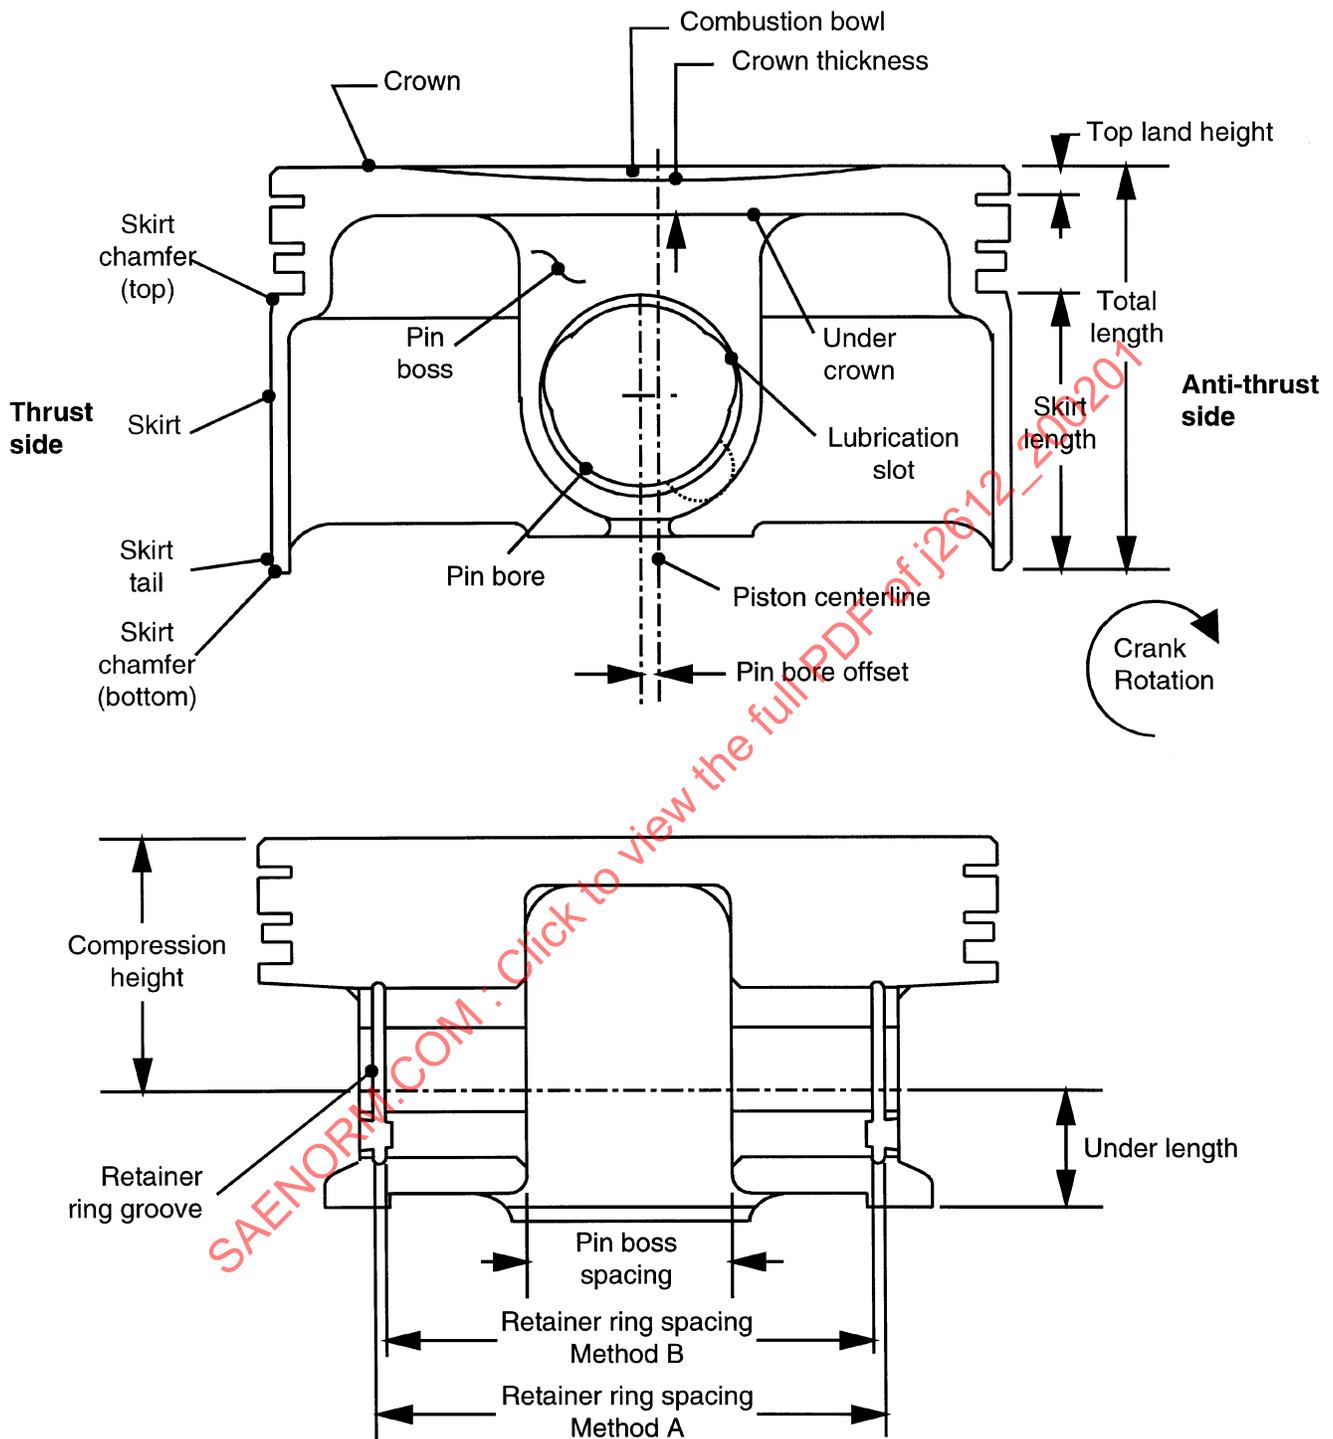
LIGHT DUTY MONOBLOCK PISTON: CUTAWAY VIEWS
